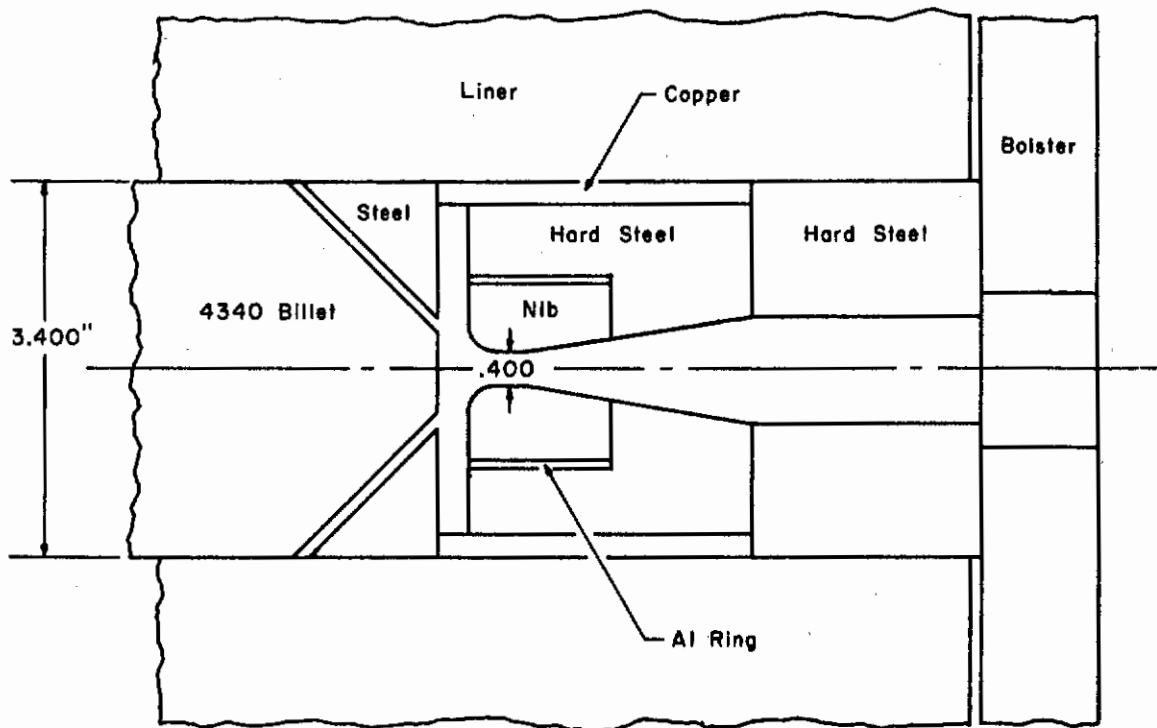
Tooling for Testing Round Dies with Steel Billets.
